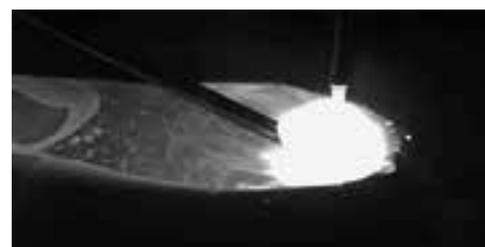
A photograph of the GMAW arc and the hot wire entering the weld pool.
